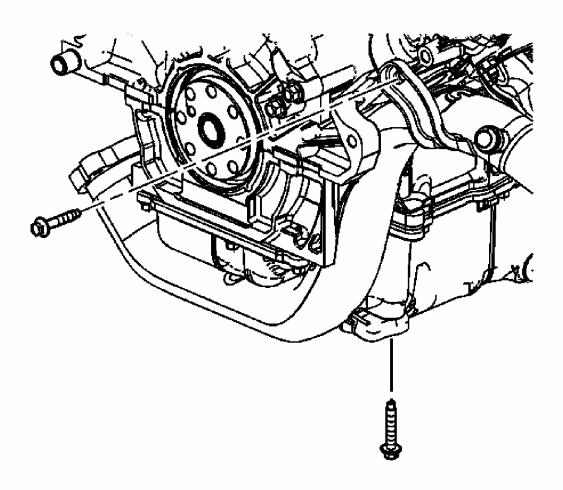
View Of Exhaust Intermediate Pipe Bolts Courtesy of GENERAL MOTORS CORP.
